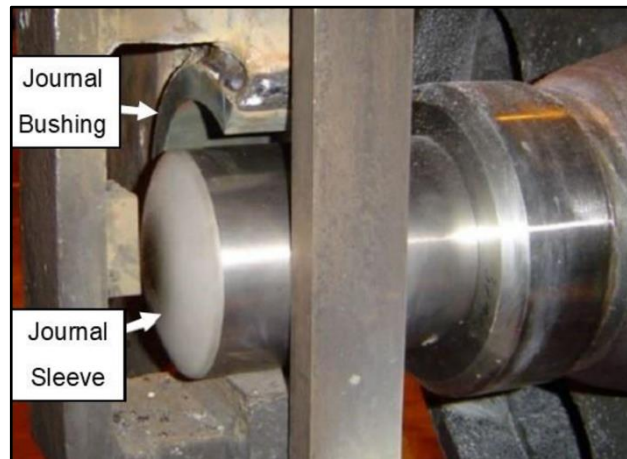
Photograph of the stabiliser roll journal bearing components used in ZODIAC. Reproduced from (Faulkner, 2020).
